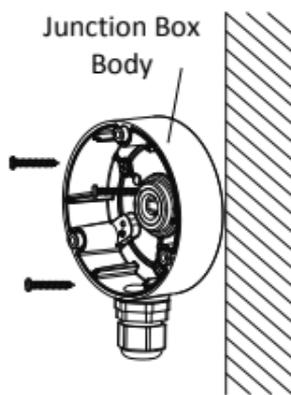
Fix the Junction Box to the Wall/Ceiling
